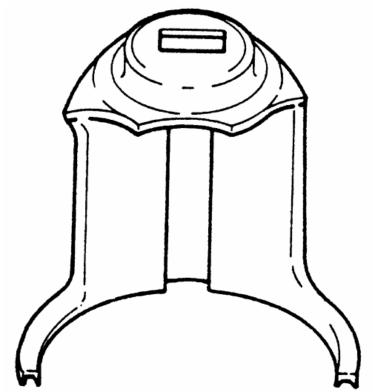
A special tool is usually available to remove or install the fuel pump locking cam
